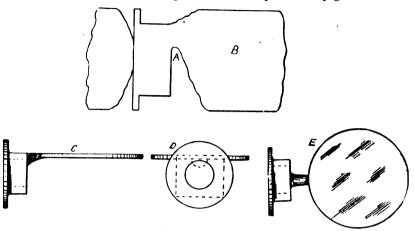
FORGING A STEP-PAD FOR AN AXLE NUT.
